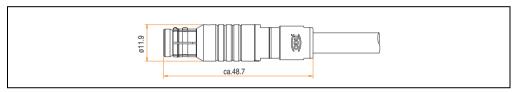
Plug dimensions (ODU Minisnap) - voltage supply cable 5CAPWR.0xxx-20
